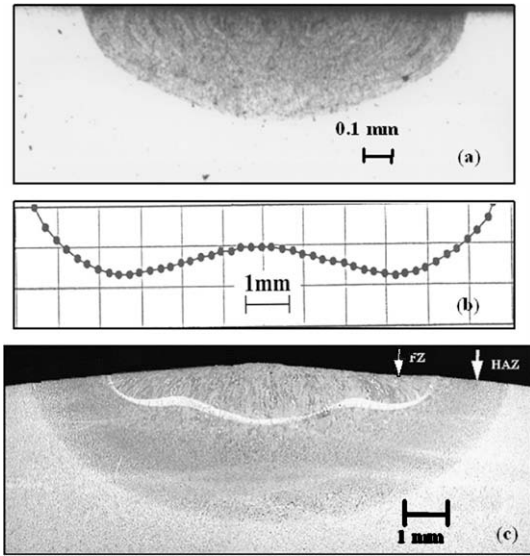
Examples of different shapes of fusion boundary: (a) arc welding of Al alloy 5182 [2]; (b) laser melting of NaNO_3 [3,4]; (c) arc spot welding of steel [5].
